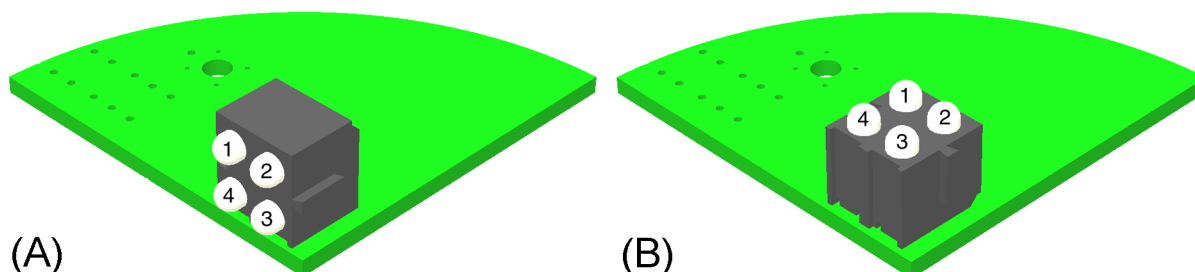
AnyBus-S LED's, with 90° angle mounting (A), and 180° straight mounting (B).
